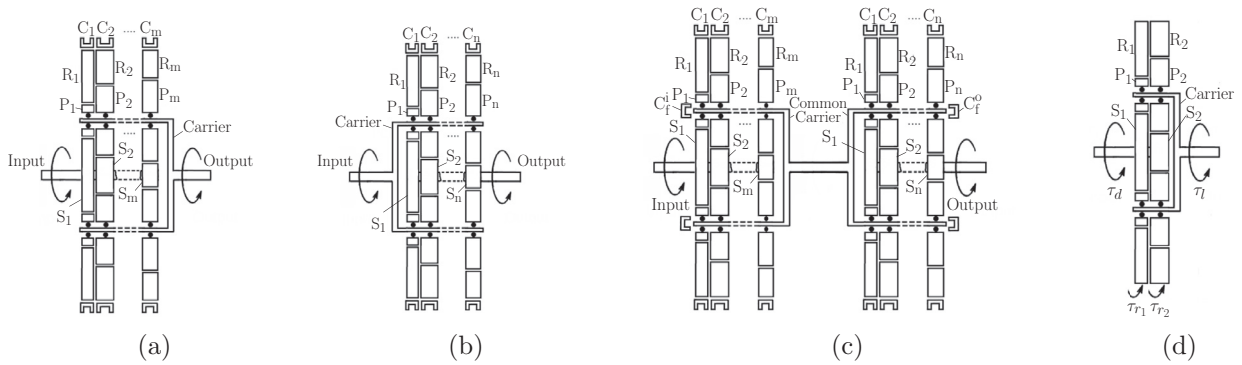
Multi-stage planetary gear sets: (a) underdrive gear train; (b) overdrive gear train; (c) combined MST; and (d) a two-stage planetary gear set.
